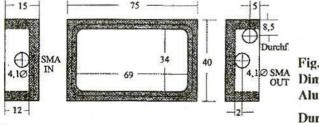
A Dimensions for the Milled Aluminium Housing in mm Durchf = Connectors
